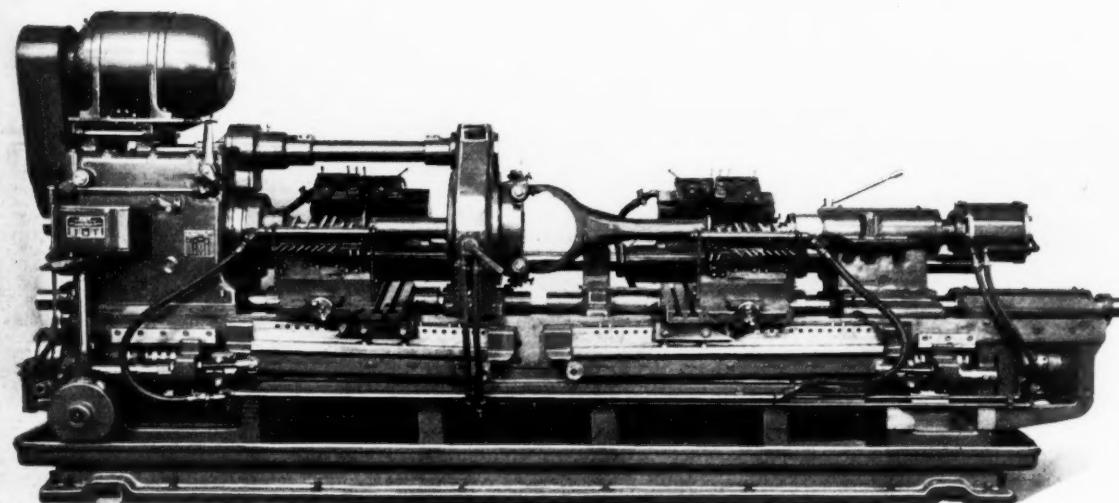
Fay Automatic Lathe Equipped with Center Drive for Machining Both Ends of Rear-axle Housing Simultaneously
